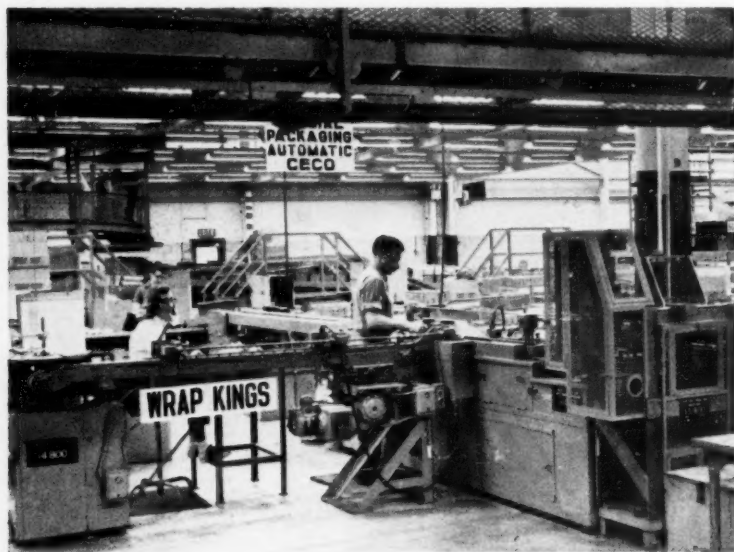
Where Packaging is Necessary it is Carried Out on Automatic Machines of the Type Shown Here
